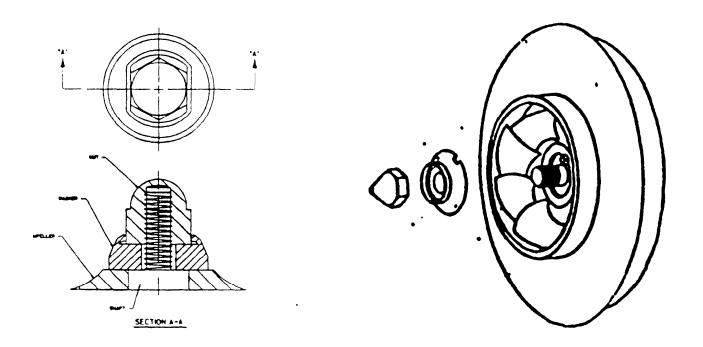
IMPELLER NOT BETWEEN BEARINGS
